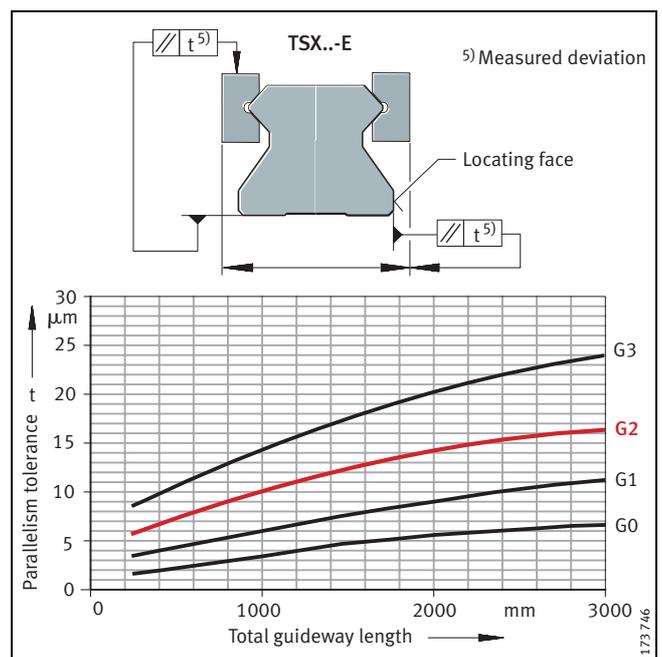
· Accuracy classes and parallelism tolerances of guideways
